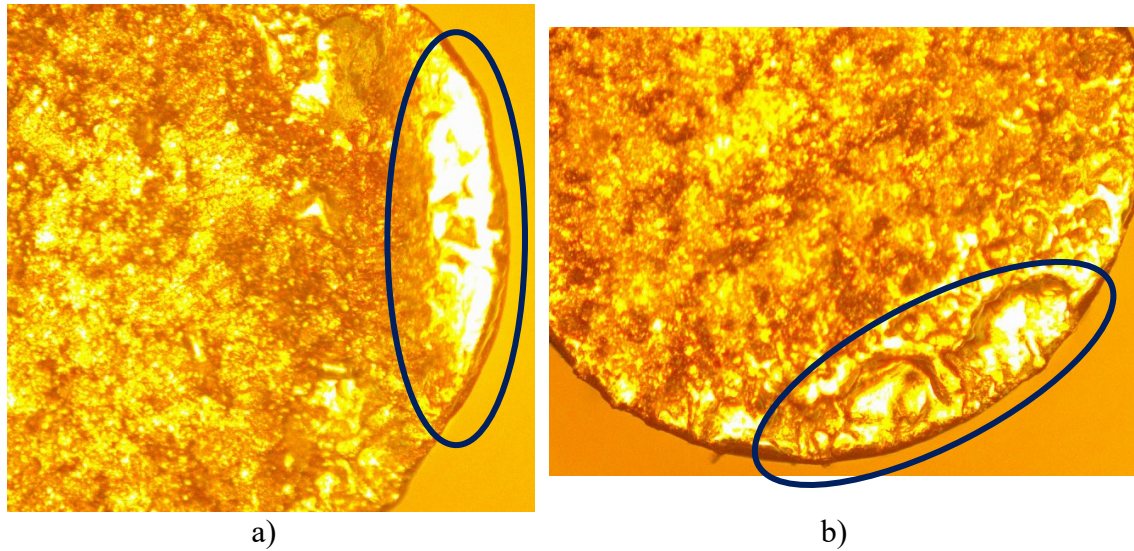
a) End surface of the sample with the bump; b) End surface of the sample with defects.
